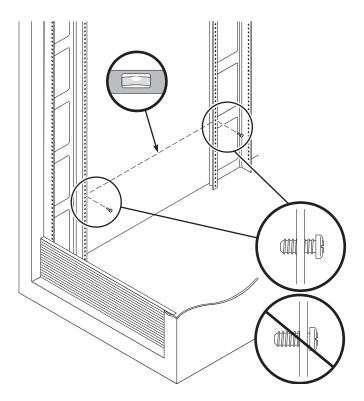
Inserting Screws in the Front and Back Cabinet Mounting Holes
